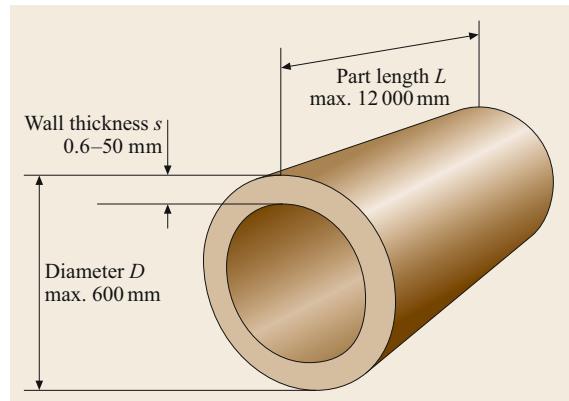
Current limits on workpiece geometry for tube hydroforming (after [11.32])
